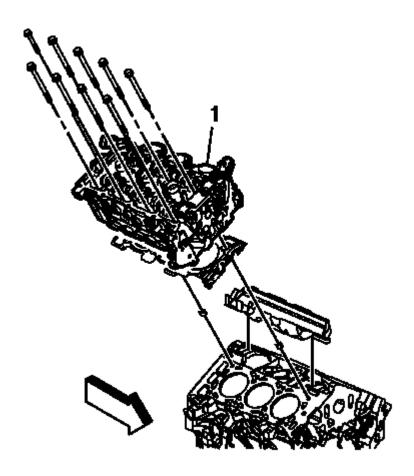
Removing/Installing Cylinder Head Exhaust Manifold Courtesy of GENERAL MOTORS COMPANY
